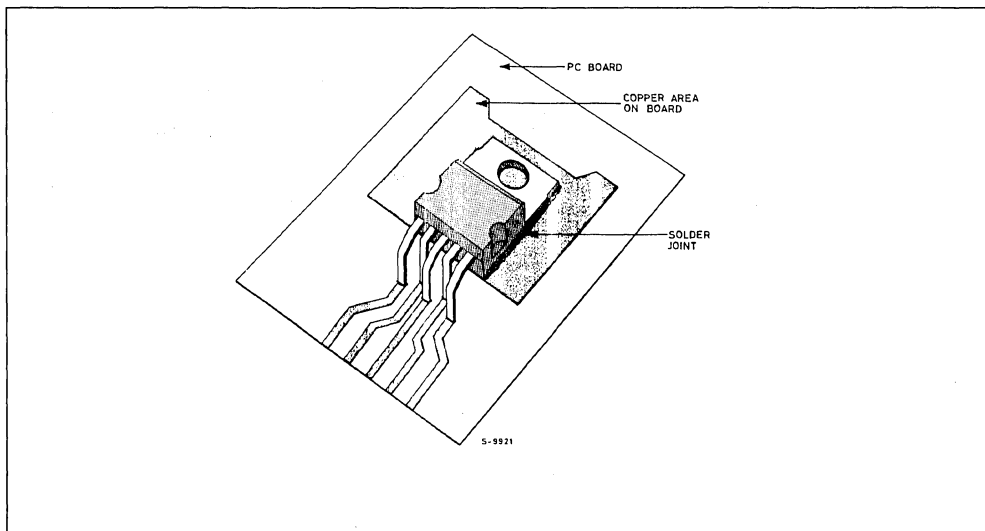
Pentawatt Soldered on Copper Heatsink on P.C Board.
